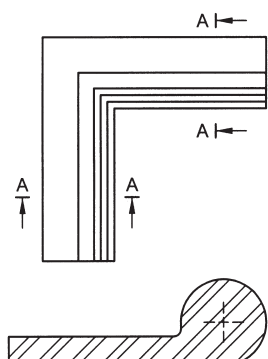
DETAILS OF MOULDED CORNER SEAL
